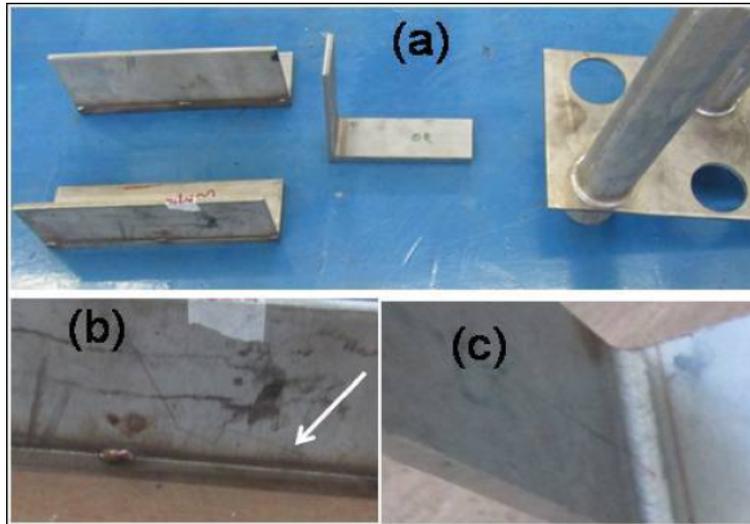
Welded test coupons, comprising all types (a), the fillet root (b) with an arrow indicating an incidental gap, and the face of the fillet weld (c).
